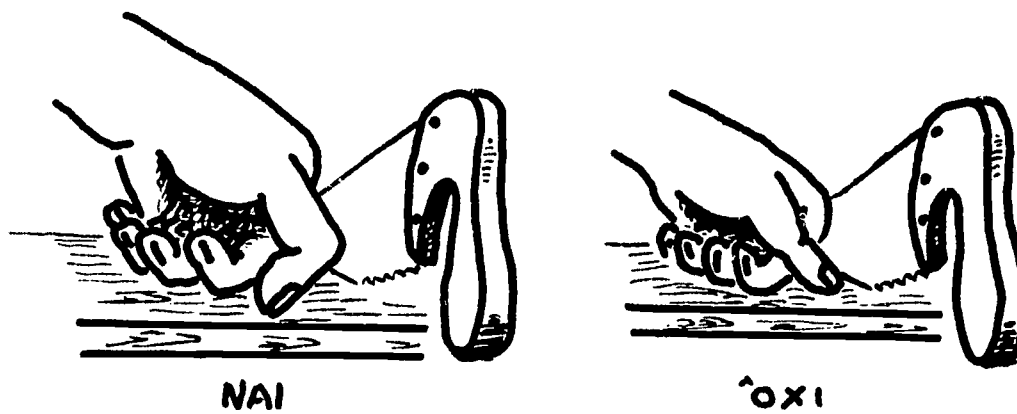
Drawing which shows how to start sawing. It is perfectly clear, without one unnecessary detail.
